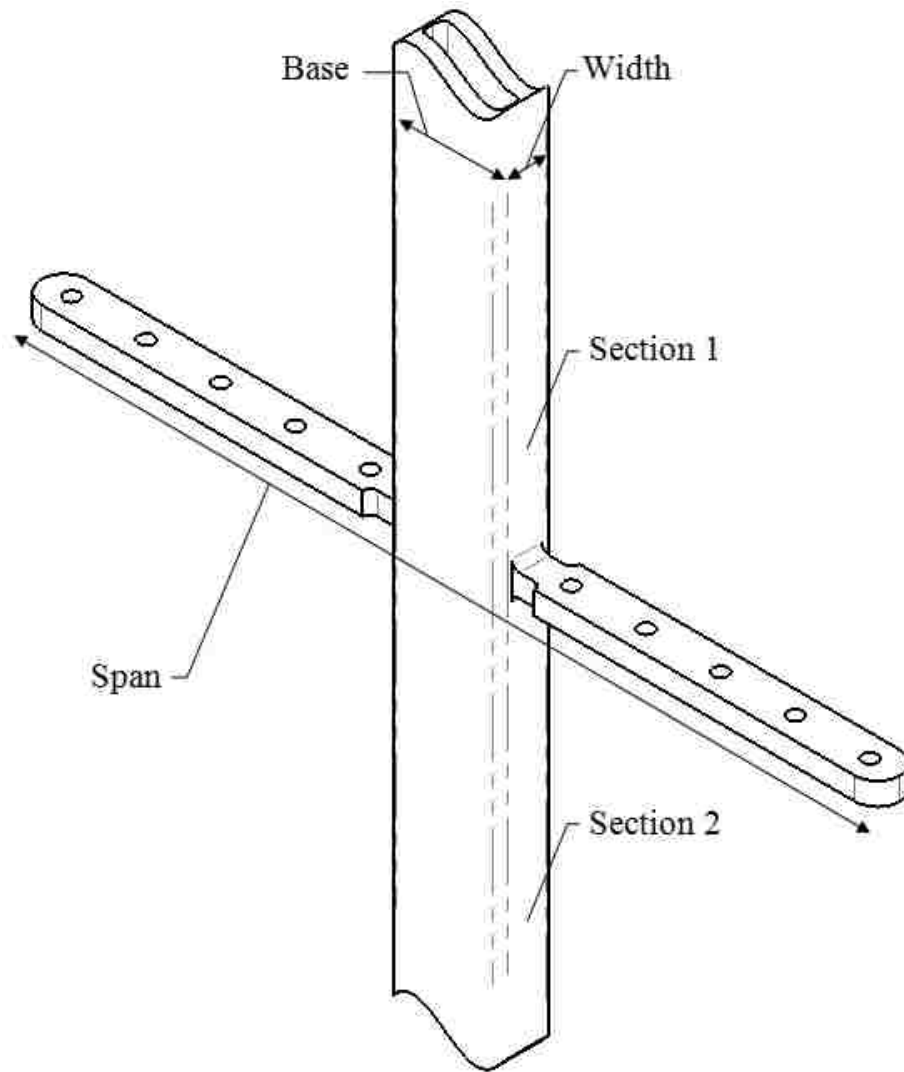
Isometric View. Bi-Cantilevered Drain/Cantilever composed of a Rectangular Drain and two Rectangular-shaped Cantilevers attached to the Width.
